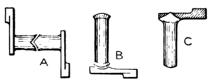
WELDING ROCKERS AND ARMS.
